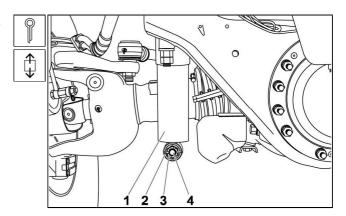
Lower attachment of the front suspension shock absorber - removal
